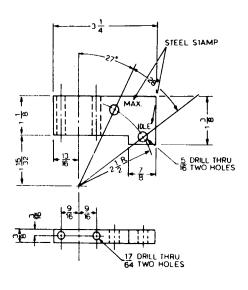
N-107. Fuel Pump Throttle Adjustment Template
